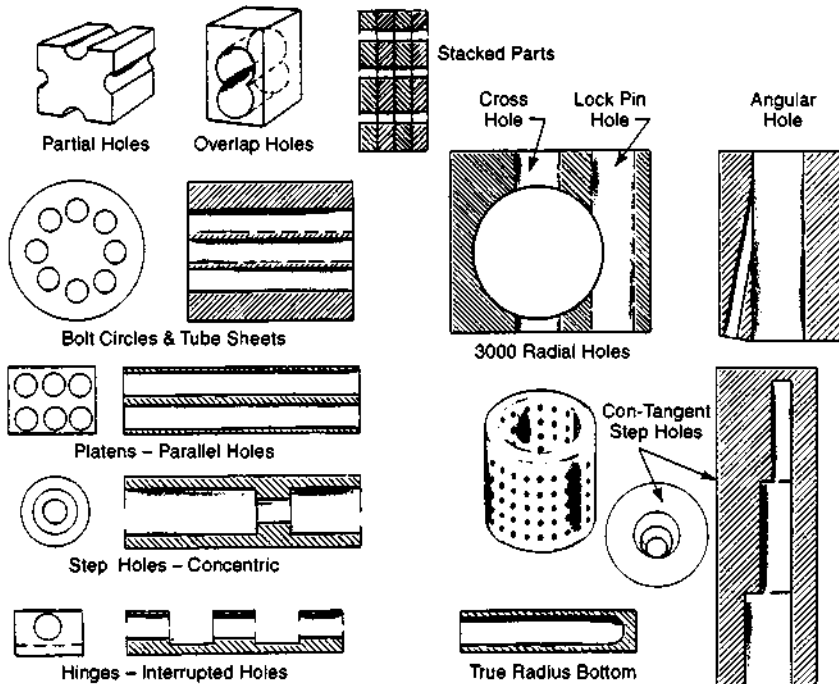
B6-1 The range of hole drilling applications, in addition to gun barrels, for which gun drills are used. (Courtesy Eldorado PCC Specialty Products)
